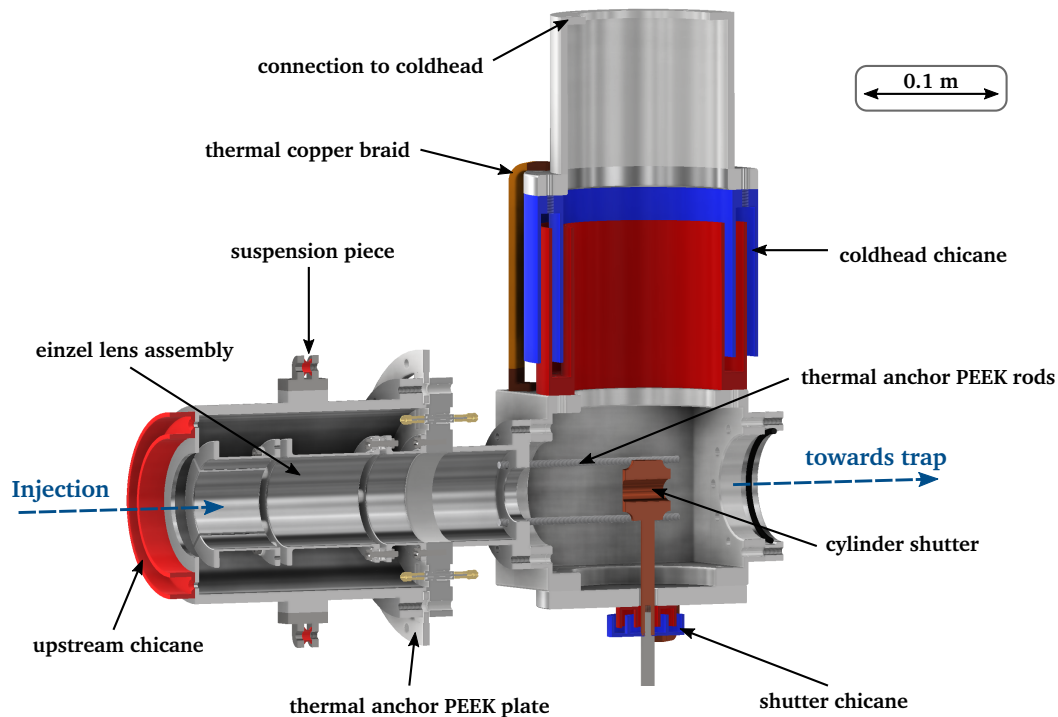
Half-section view of the upstream 50 K assembly up to the removable flange of the main tube.
